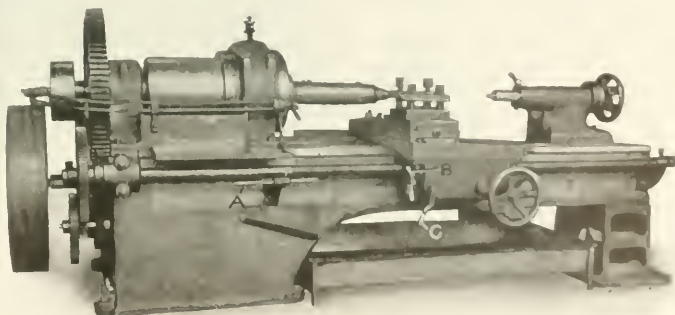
Type of Lathe developed for performing Rough- and Finish-turning Operations on High-explosive Shells
